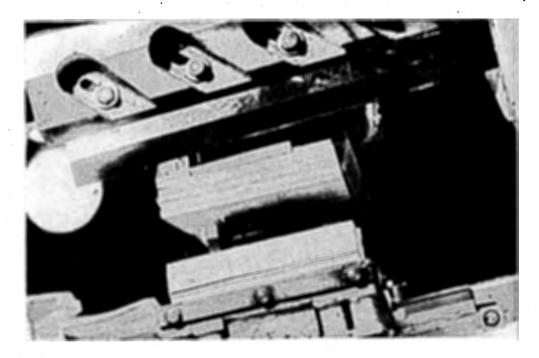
Three-knife cutting machine allowing to keep standard size of our publications for many years.
